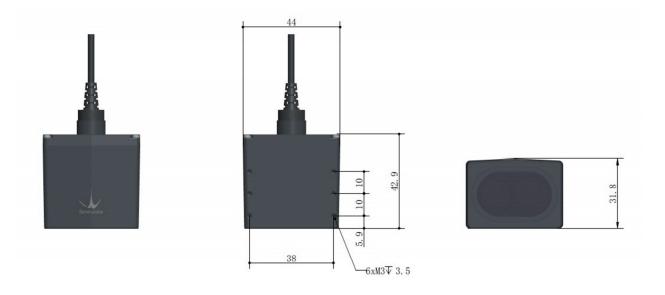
TF03 structure dimensions (Left 1: top view, Left 2: vertical view, Left 3: front view)
